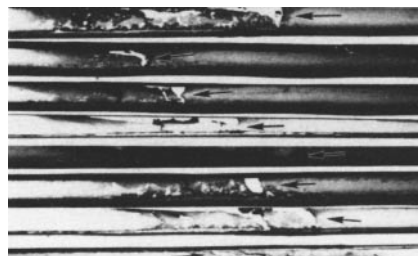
Radiographic testing of thrust chamber tube-to-tube braze joints:
